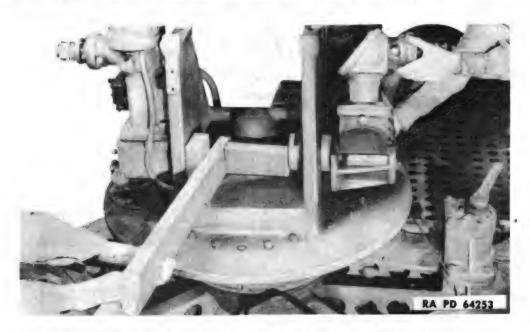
Forcing Elevating Mechanism from Trunnion Frame
